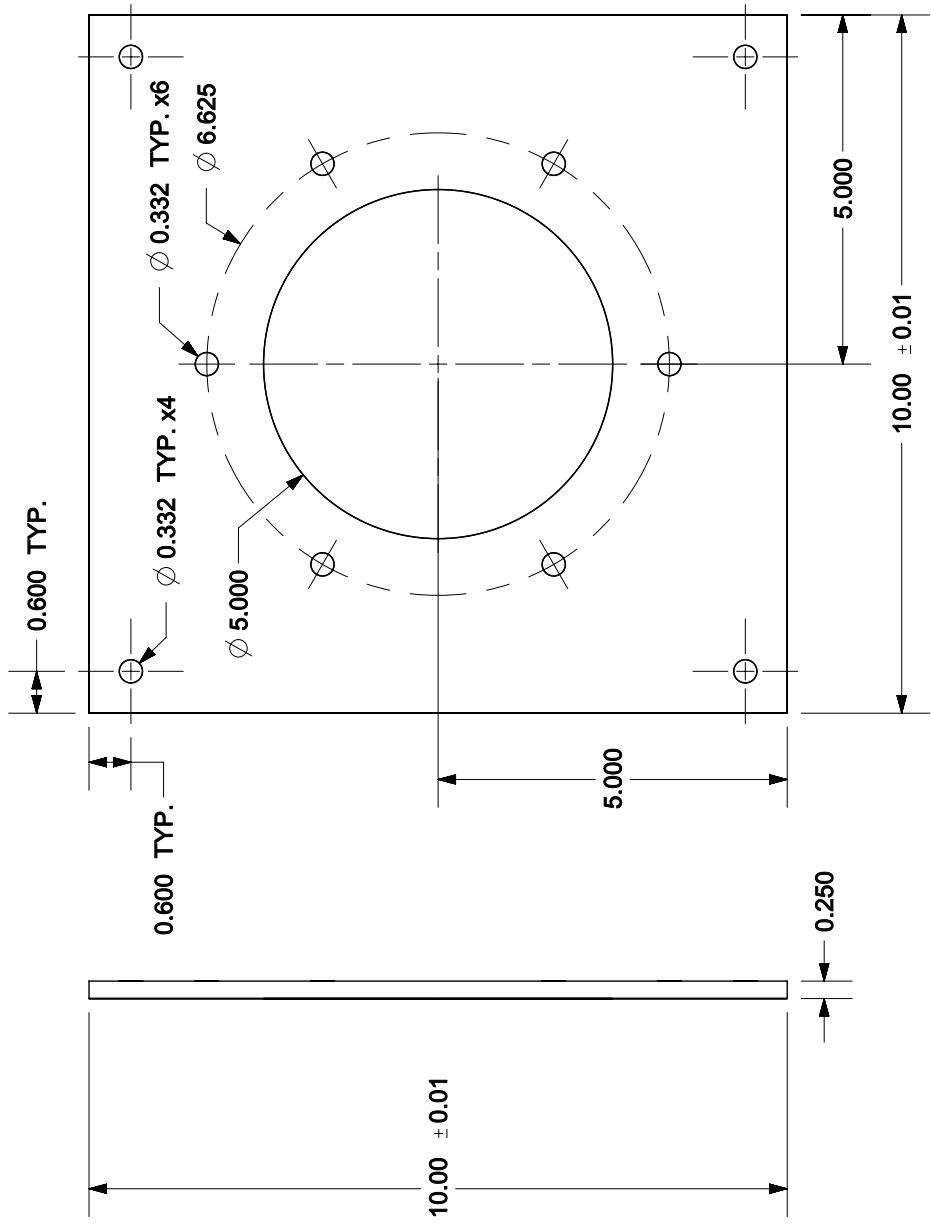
Drawing of the compressor backing. Courtesy of Jonathan Tellefsen.
